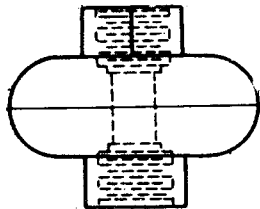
Insulated Joints for Air Pipes and Control Conduits
